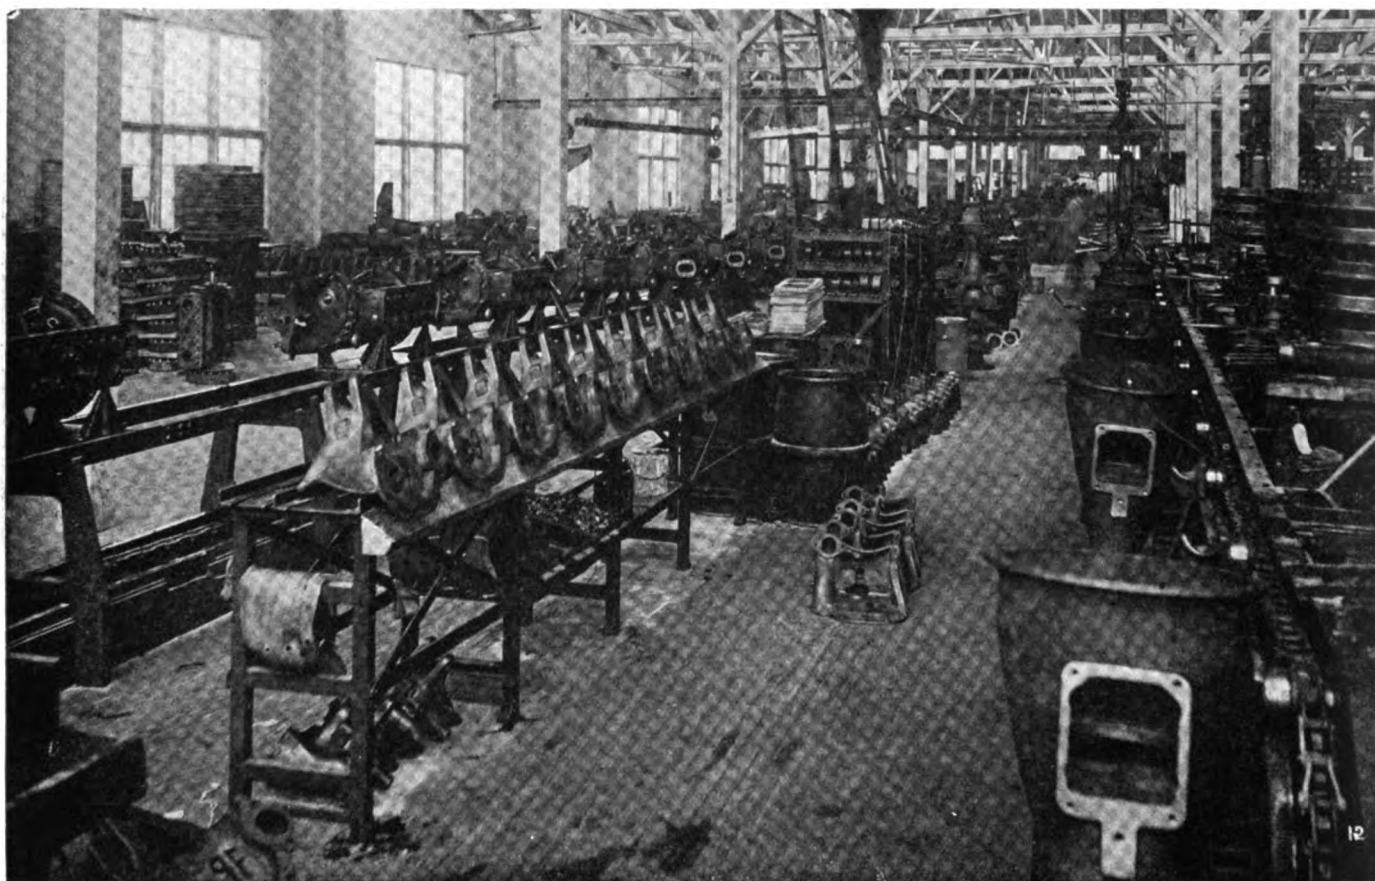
View of cylinder block track with rack of timing gear housings in foreground
